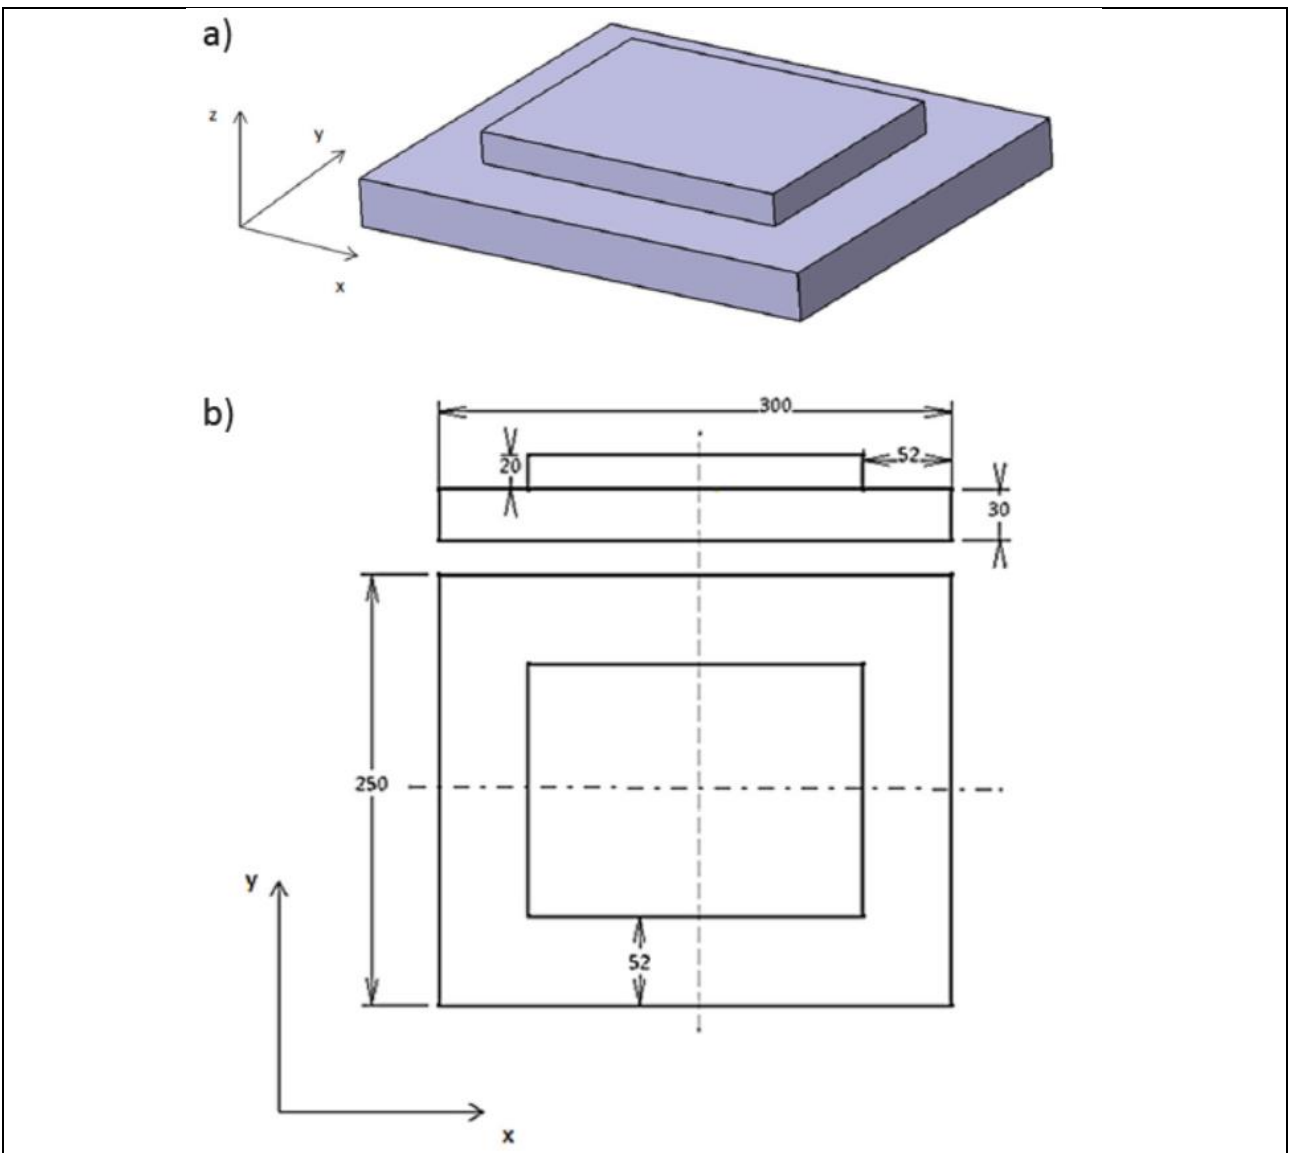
Test piece of a numerically controlled milling machine (a) model, (b) dimensions (Piorkowski & Skoczynski, 2021).
